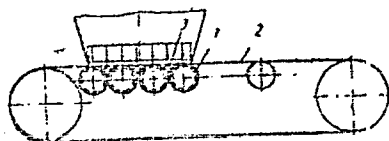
1- supporting rollers; 2- conveyor belt;
